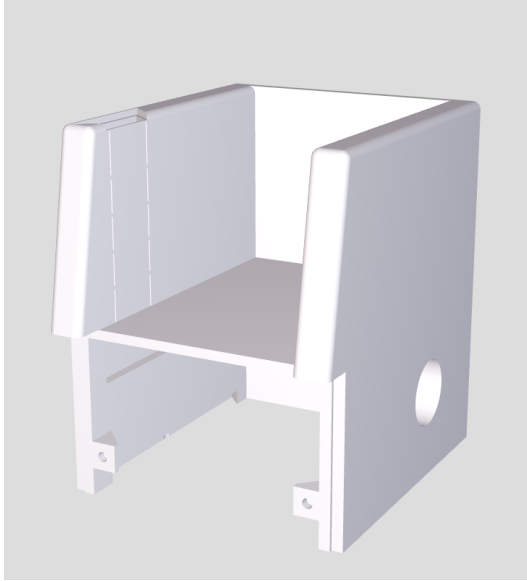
Selected 3D-printed structural parts: moving upper card holder and rotating lower support.
